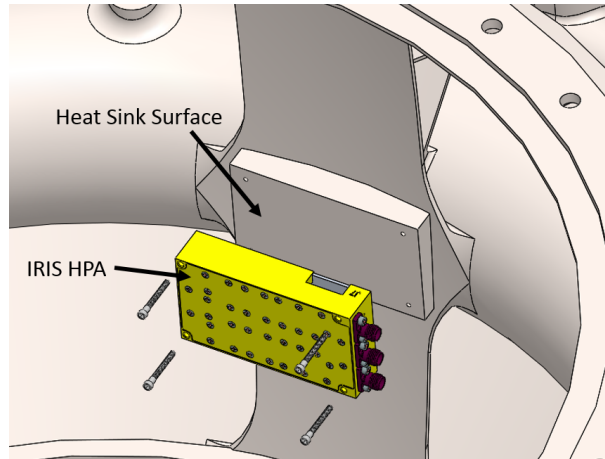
Exploded view of Iris High Power Amplifier attachment location.
